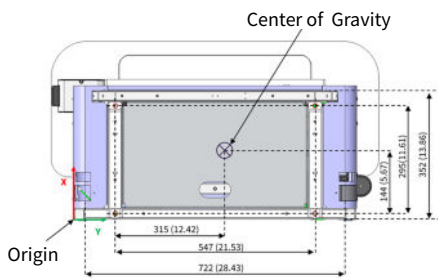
Adjustable Control Station dimensions - mm (inches)
